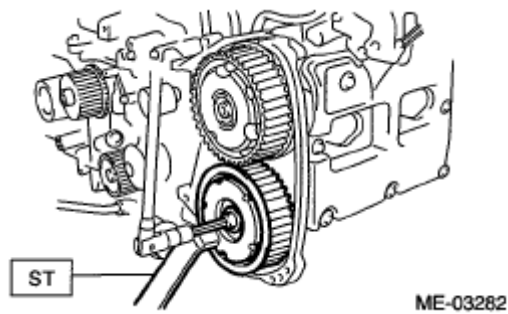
Removing/Installing Cam Sprocket Bolt Using Cam Sprocket Wrench
